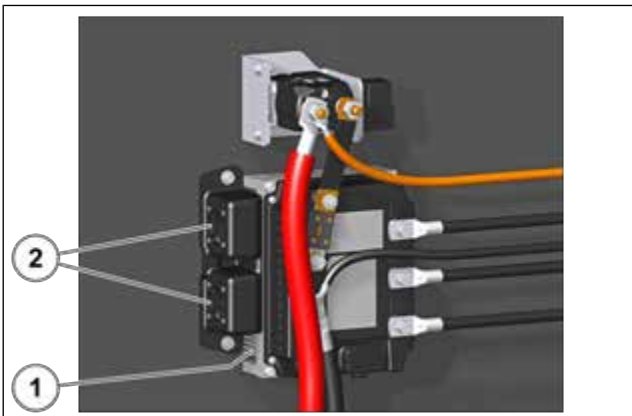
Cleaning the heat sinks and electric pump drive fans - from machine No. MAN00000J01101634
